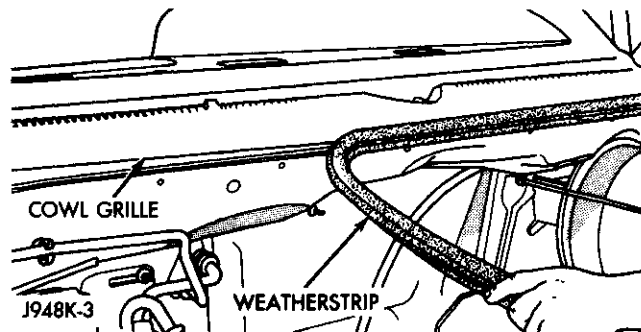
Cowl Plenum Cover/Grille Panel Weatherstrip
